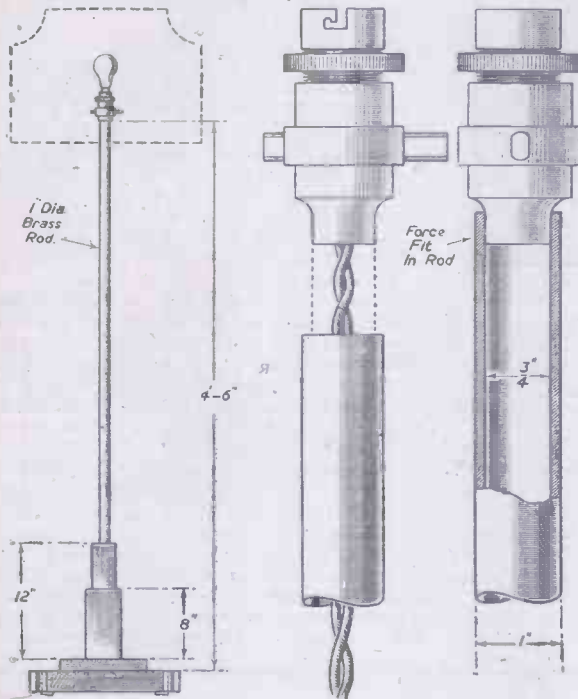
(Left).—Side elevation and enlarged details of lamp holder and tubular column.
